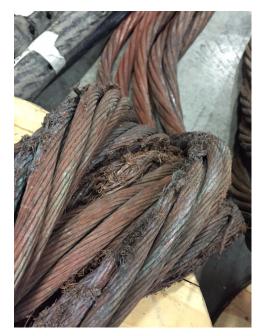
Example of broken conductor bundle caused by lack of core in original cable assembly.
